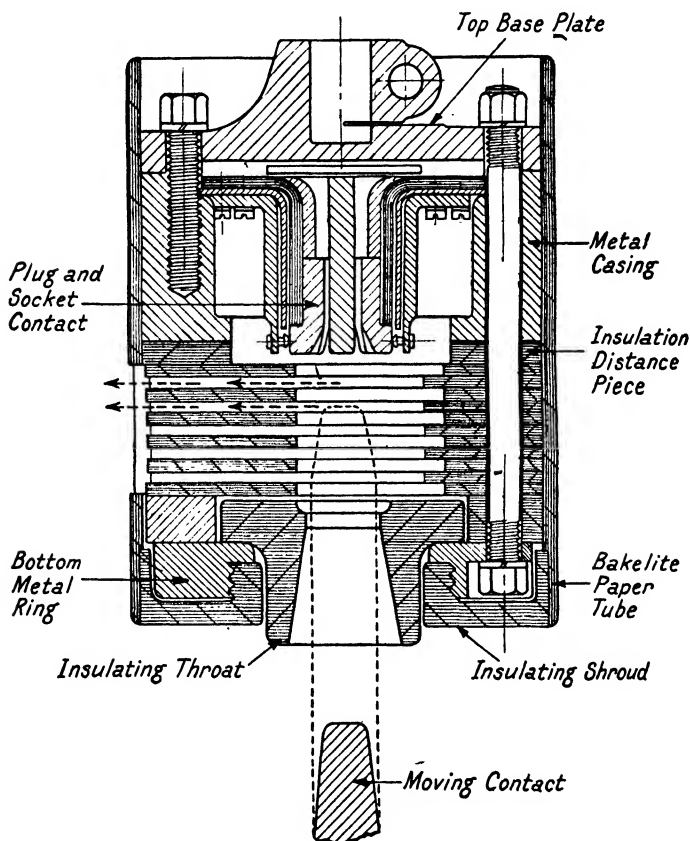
SECTION THROUGH A TURBULATOR CONTACT
